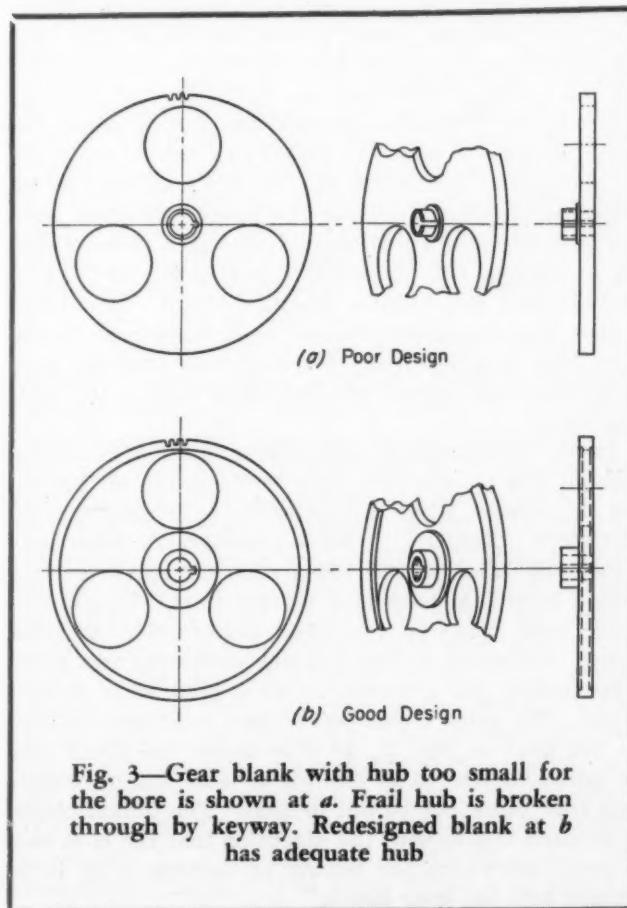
Gear blank with hub too small for the bore is shown at *a*. Frail hub is broken through by keyway. Redesigned blank at *b* has adequate hub
